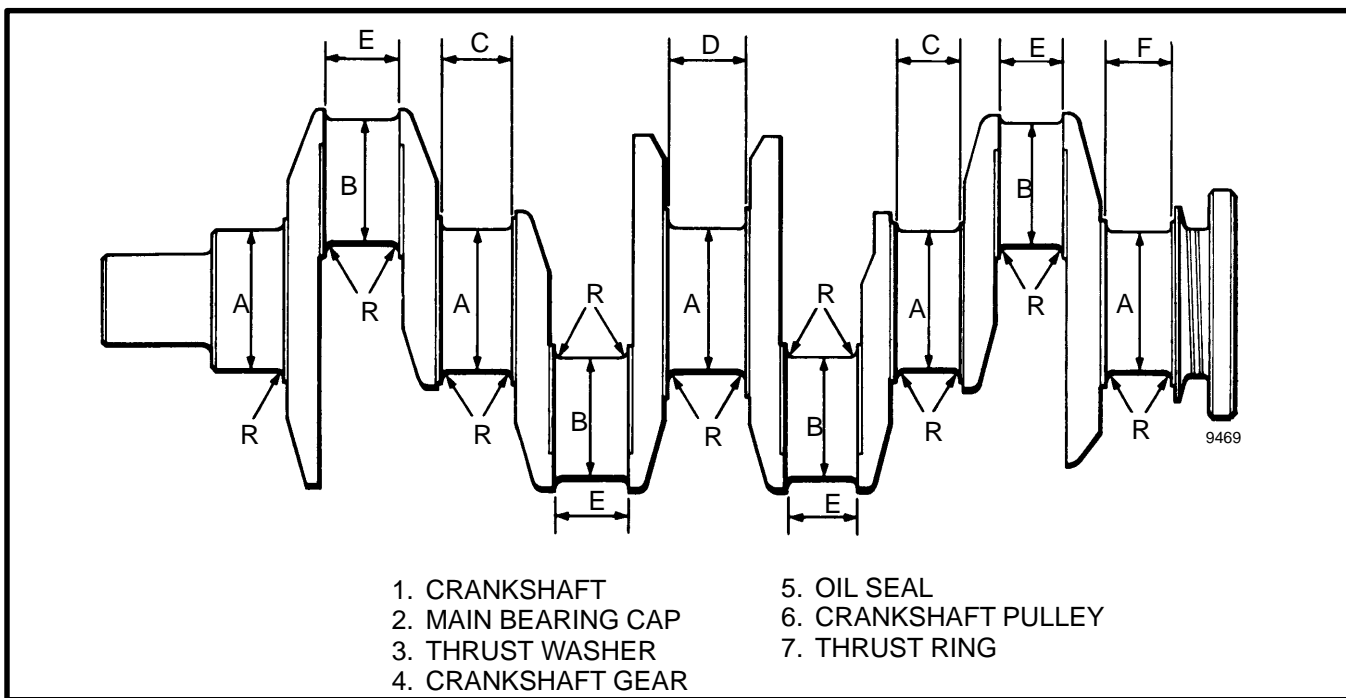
CRANKSHAFT SPECIFICATIONS
